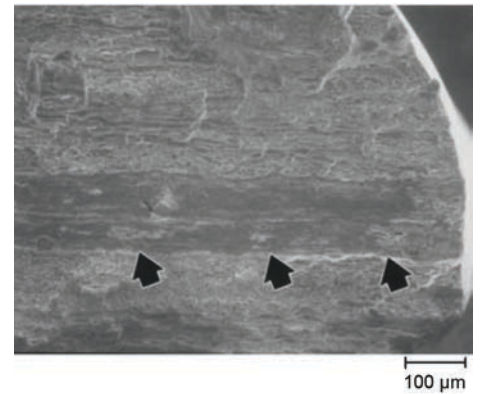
Higher-magnification view of fracture surface shown in Fig. 11 at origin of cracking. Arrows indicate large manganese sulfide inclusion at origin.
